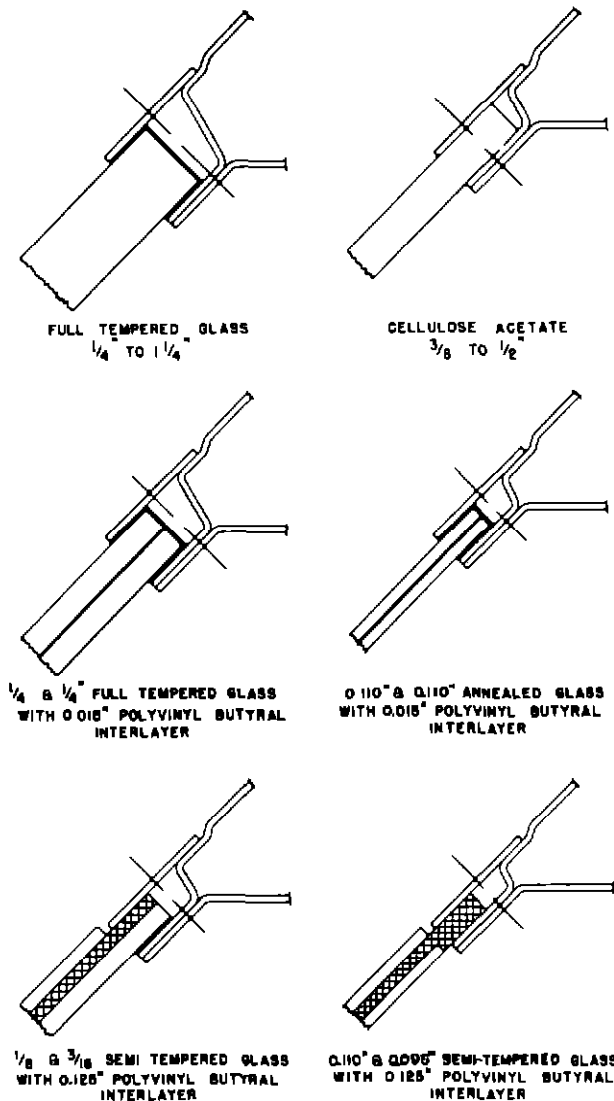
Type I Windshield Panel Single Pane With Rigid or Clamped Edge Type of Mounting
